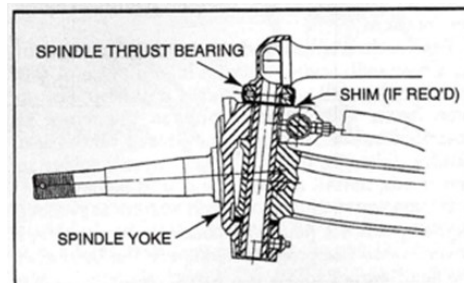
A shim may be needed to take up the clearance between spindle thrust bearing and spindle yoke.
